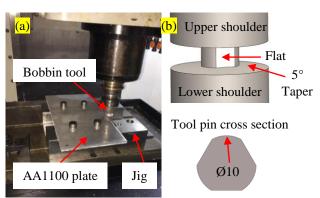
(a) Welding Setup And (B) Bobbin Tool Geometry
